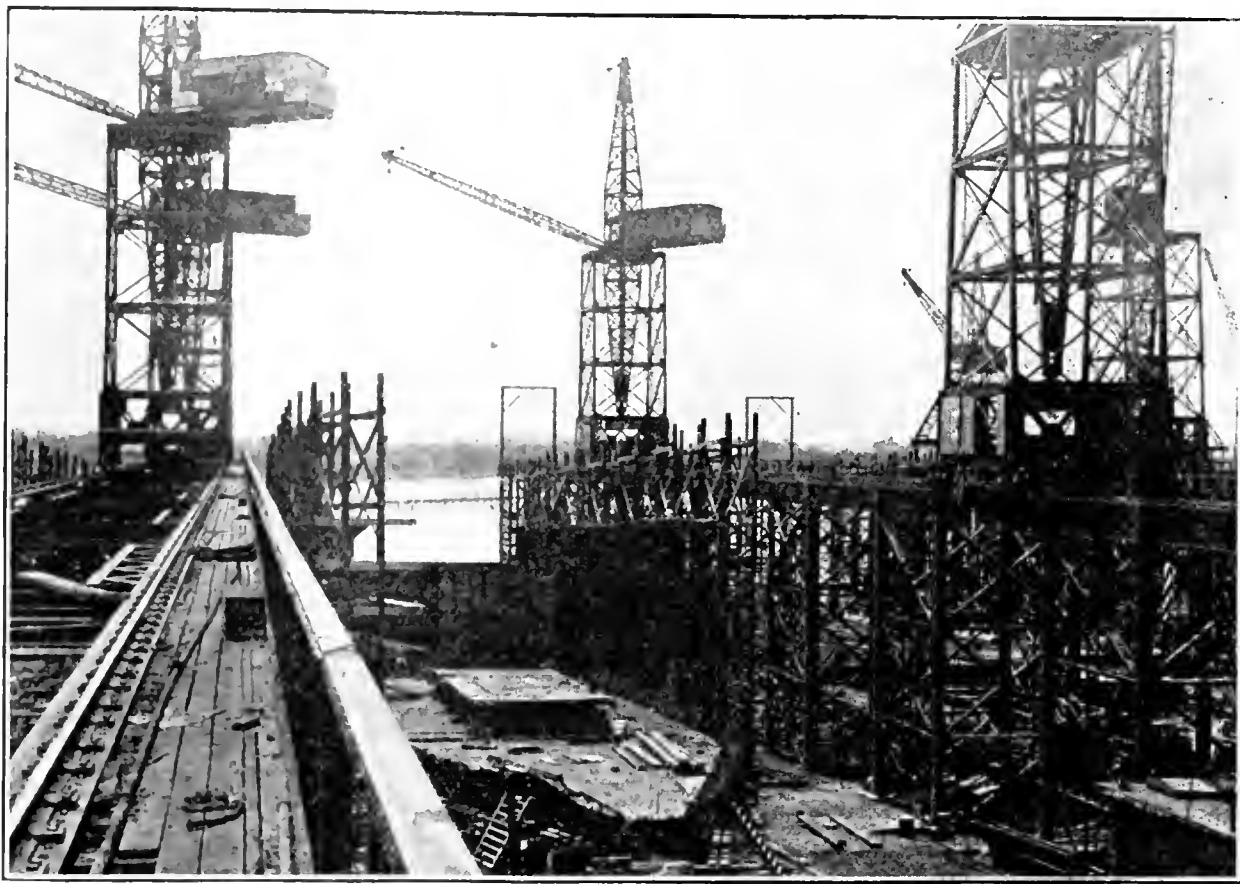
SHIPBUILDING CRANES AT BRISTOL TRAVEL ON TRESTLES
